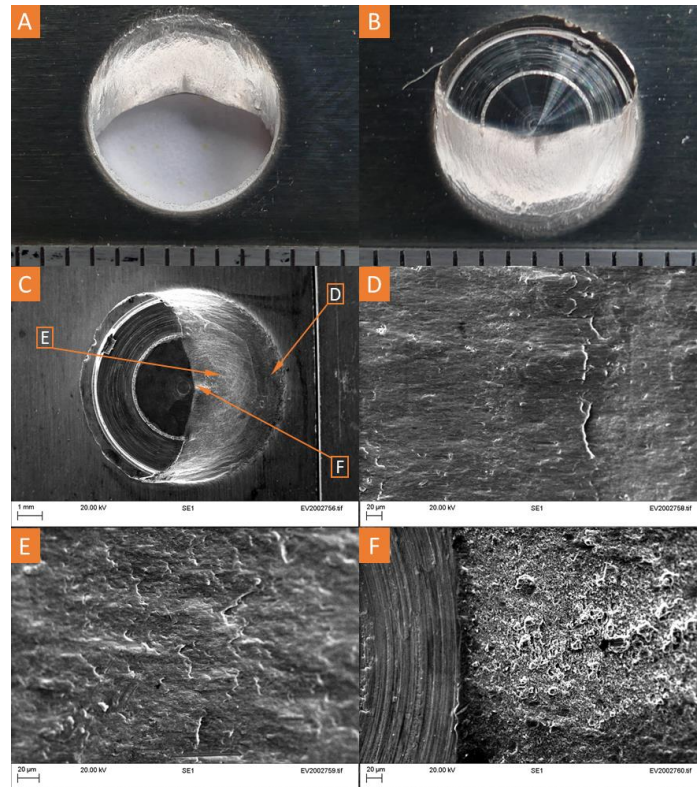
Fracture surfaces of RFSSW AA7075-T6 using Tool 1:
